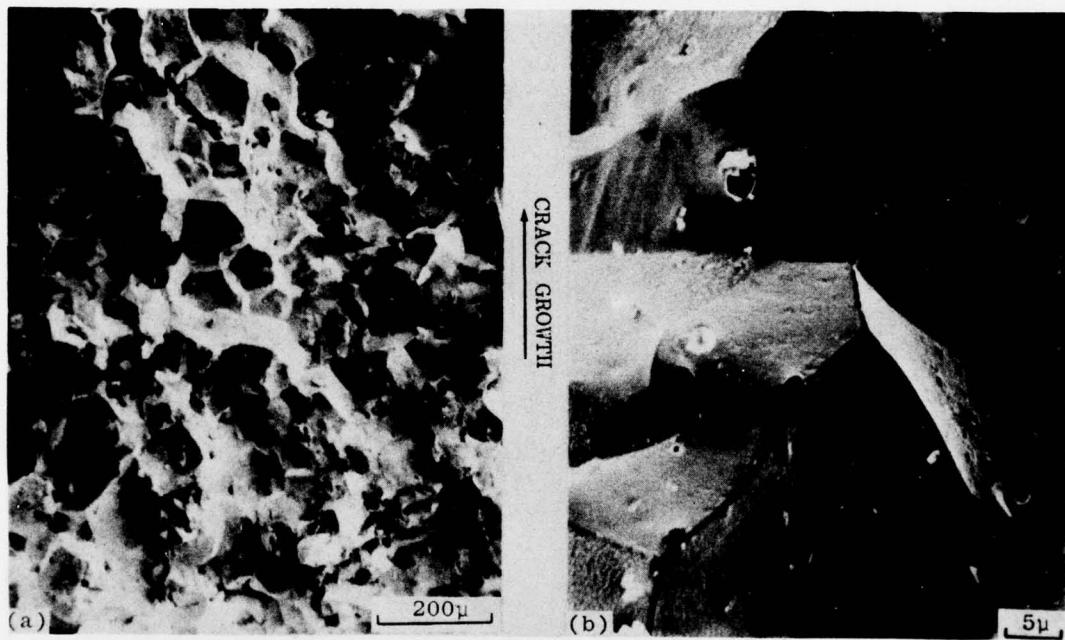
Fracture surfaces for heat treatment B
